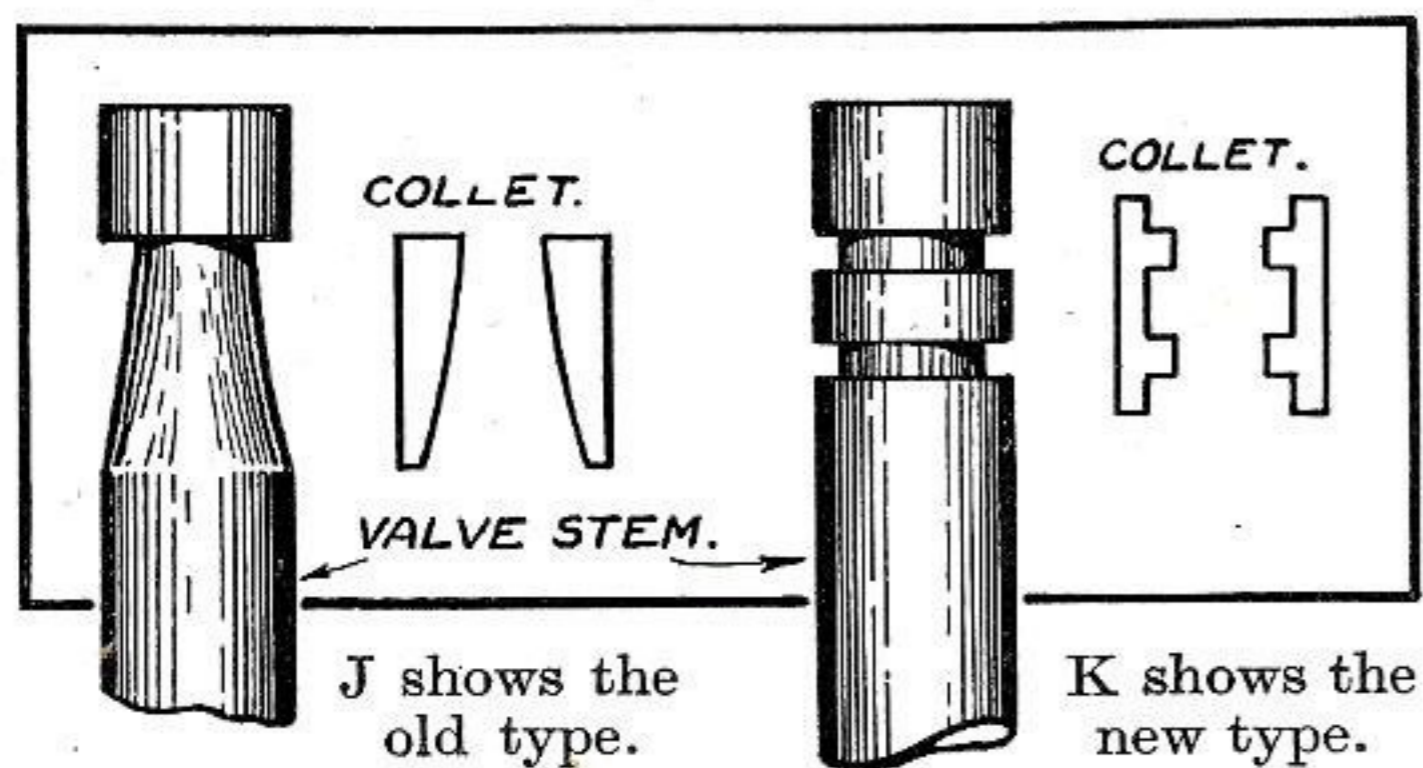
OLD AND NEW TYPE OVERHEAD VALVE COLLETS.
